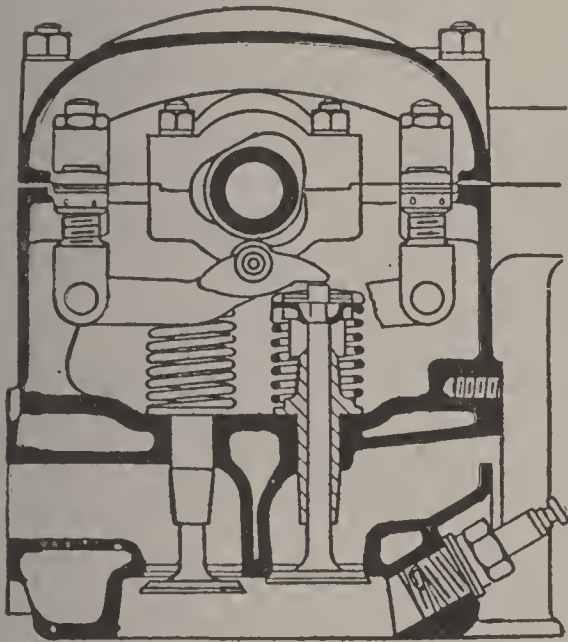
Overhead Valve Motion with Followers Working Directly on Valve Stems and Having no Push Rods
